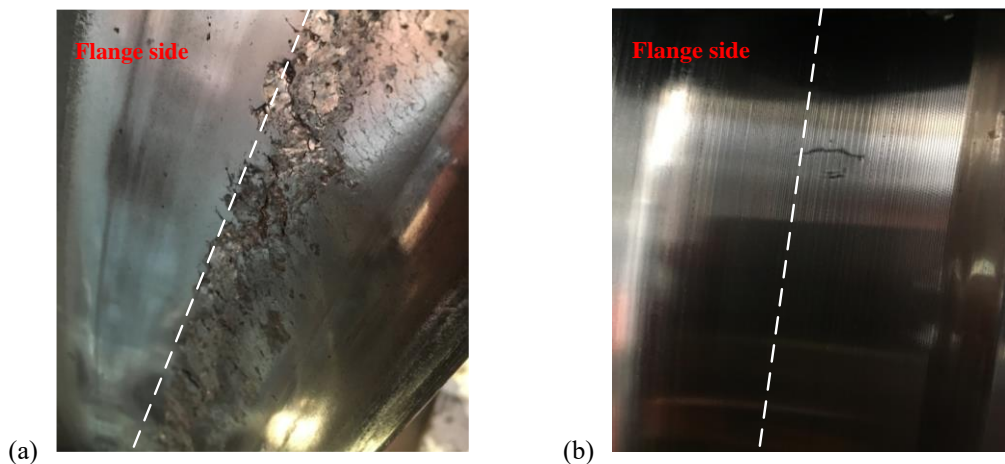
Typical damage: (a) surface deterioration, and (b) transverse cracks after wheel turning.
